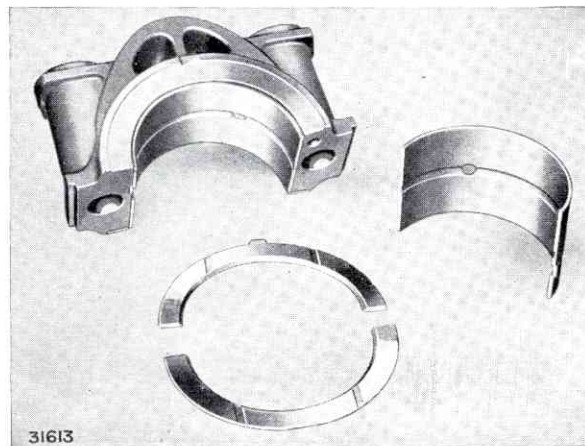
CENTRE MAIN BEARING AND THRUST WASHERS
